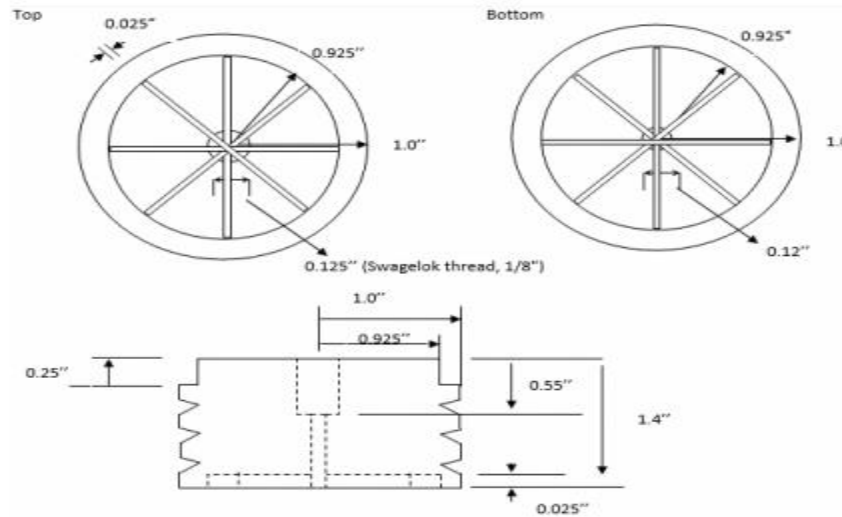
Custom polycarbonate end cap pieces (Jin, 2019)
